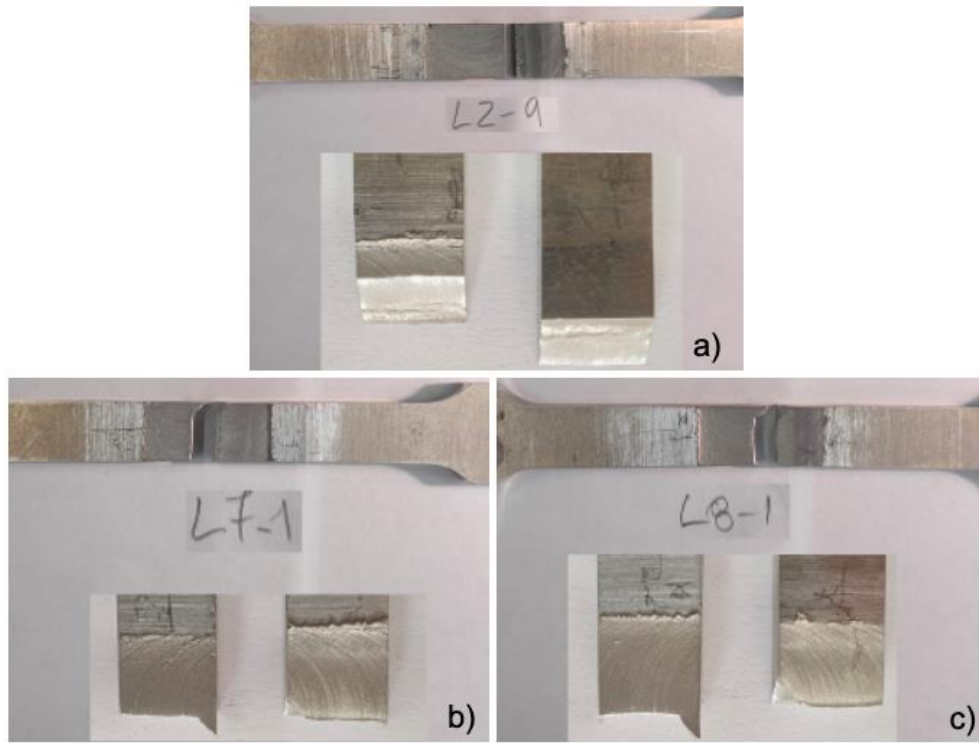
Fracture surface of the specimens used in the uniaxial quasi-static tensile tests.
